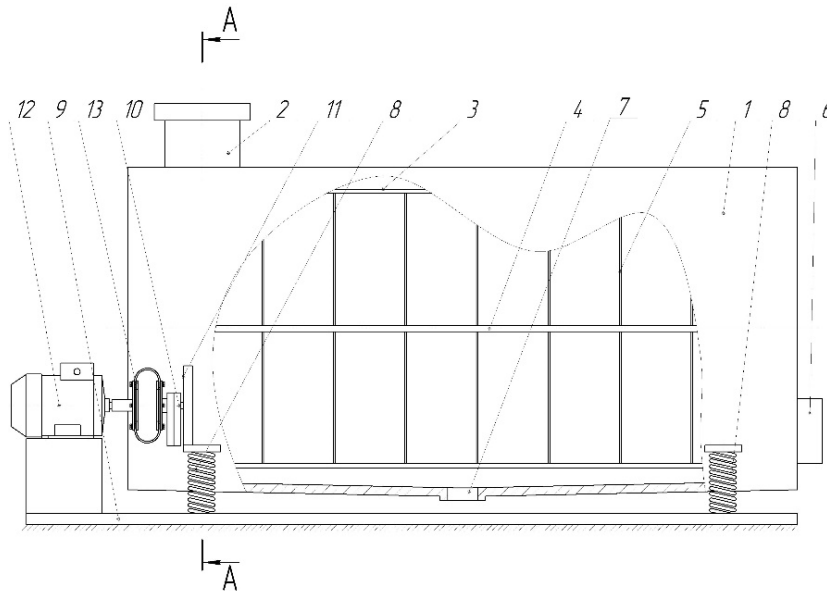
Scheme of a vibrating machine for dry cleaning of root vegetables, main view
